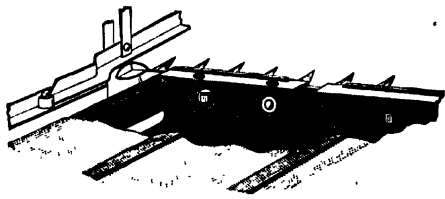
SPRING TENSION FOR PLATFORM CANVAS.
